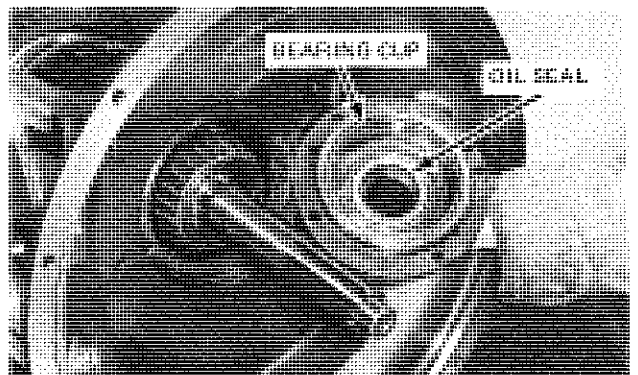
Inspect Front Bearing Cup and Oil Seal
